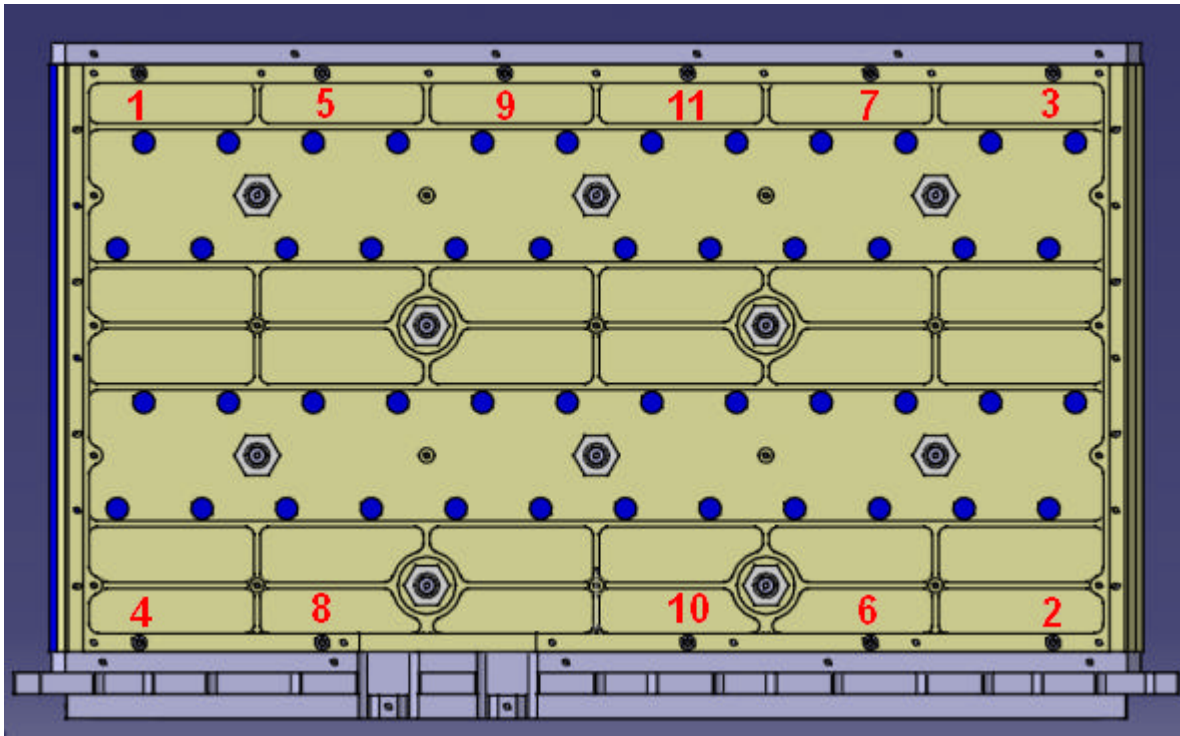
3: Torquing Sequence for Securing the Close-Out Plate to the Top Frame/Base Plate Assembly
